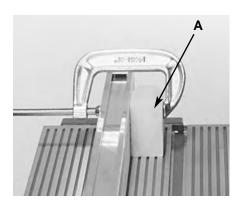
Construction details of a miter gauge extension with sliding stop.
